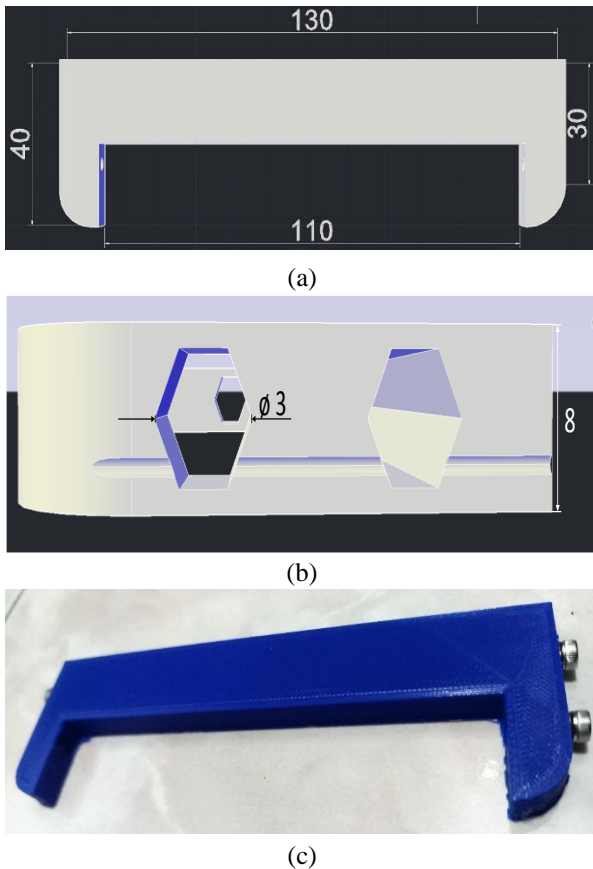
Fiber holder design. Measurement units are in (mm). (a) Top View, (b) Side view, (c) Printed Fibre holder
